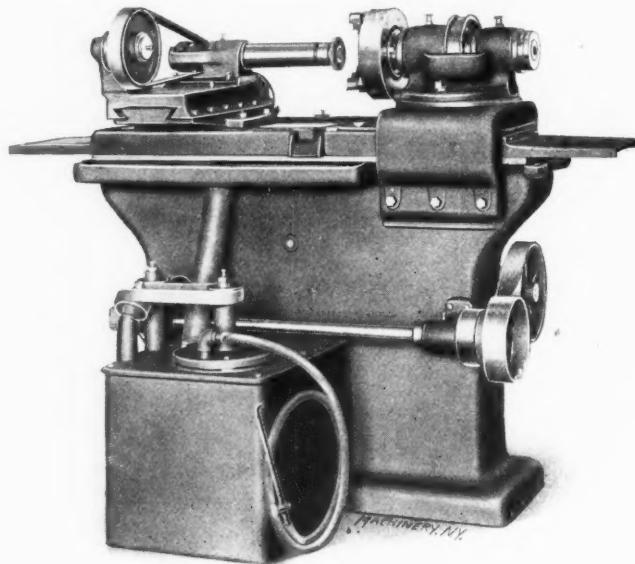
Rear View of Machine showing Drive of Wheel Spindle and Provision for Wet Grinding.
